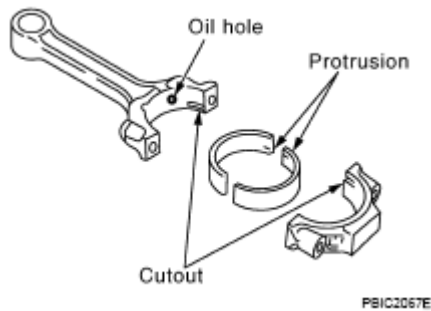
Identifying Rod Bearing Stopper Protrusion And Rod Bearing Caps Cutout
